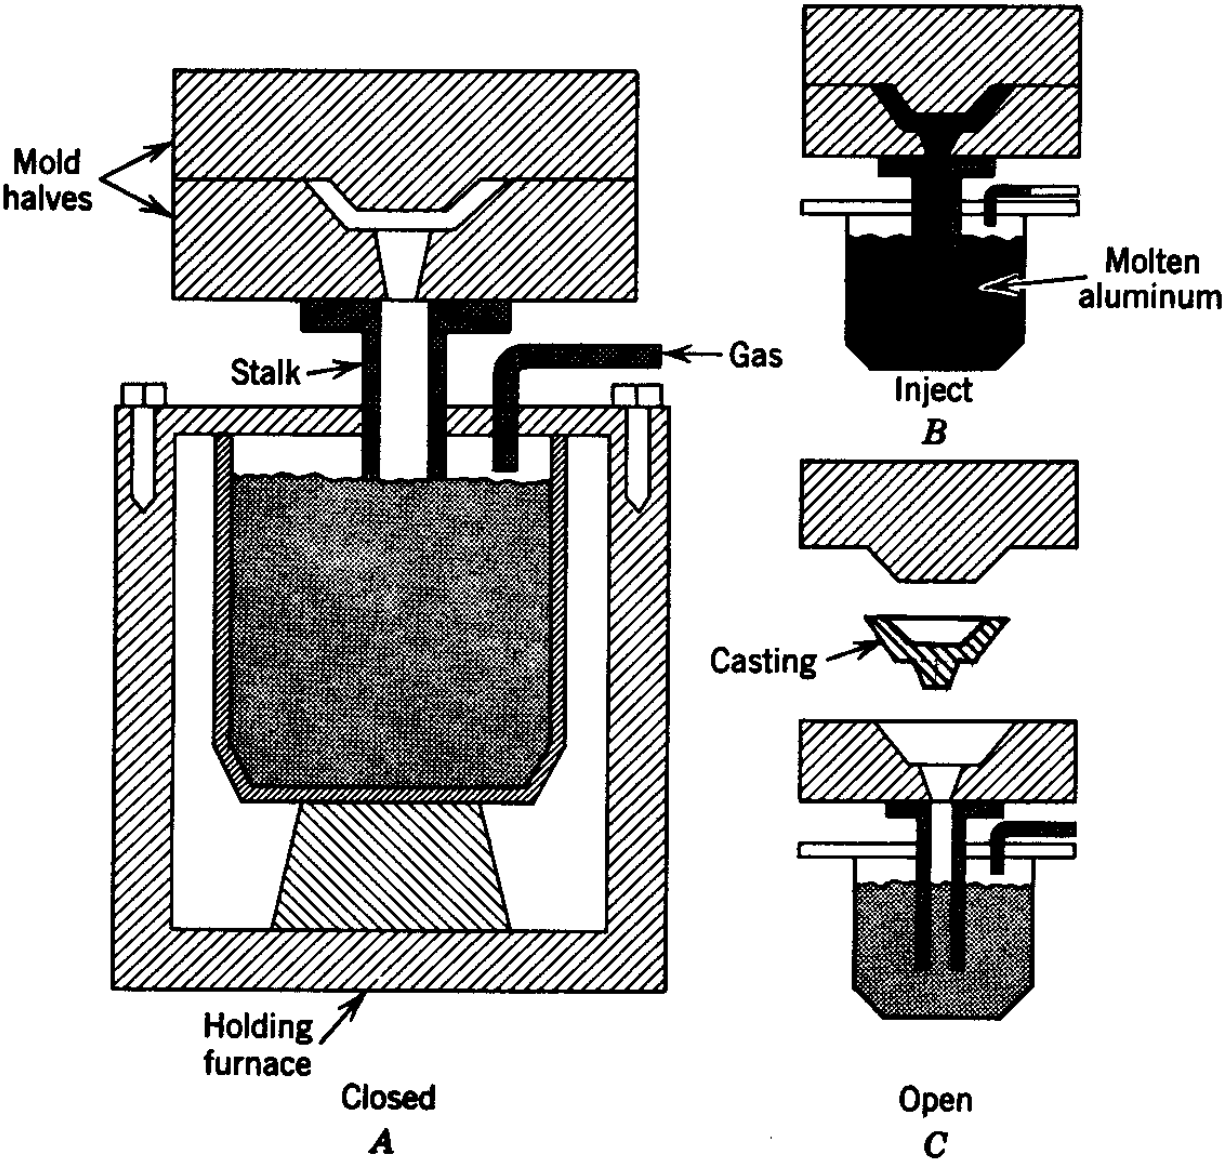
, Manufacturing Processes, by Amstead, Ostwald, Begeman, Wiley
